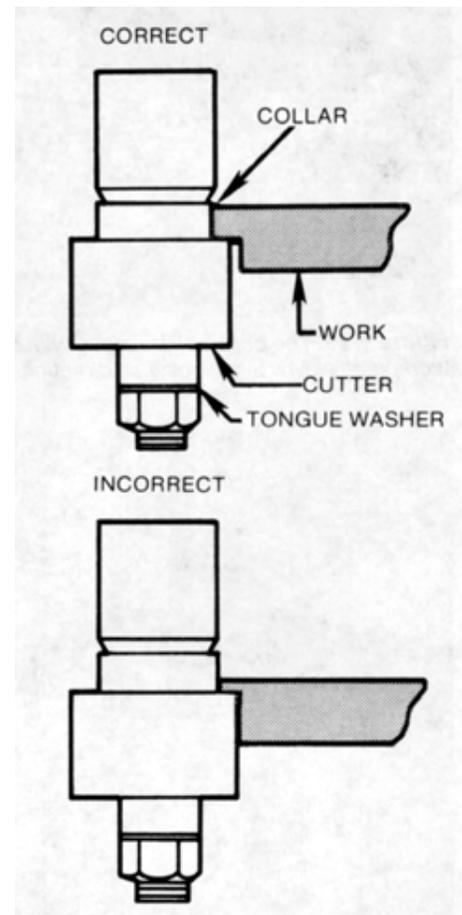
Collars control the depth of cut. Always be sure there is enough bearing surface between the workpiece and the collars.
